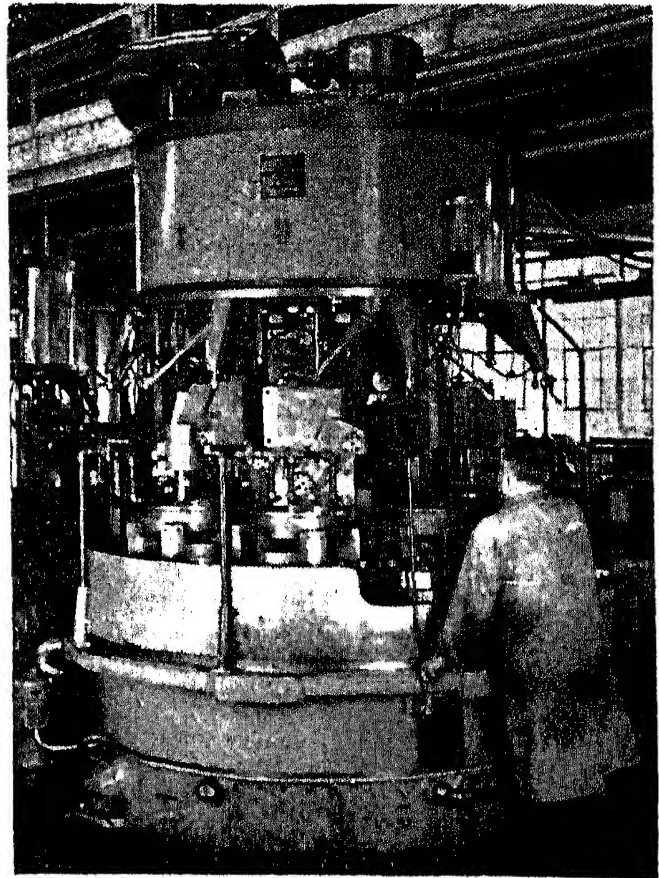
A 16-23 in.-8 spindle vertical chucking machine. (Courtesy The Bullard Co.)
